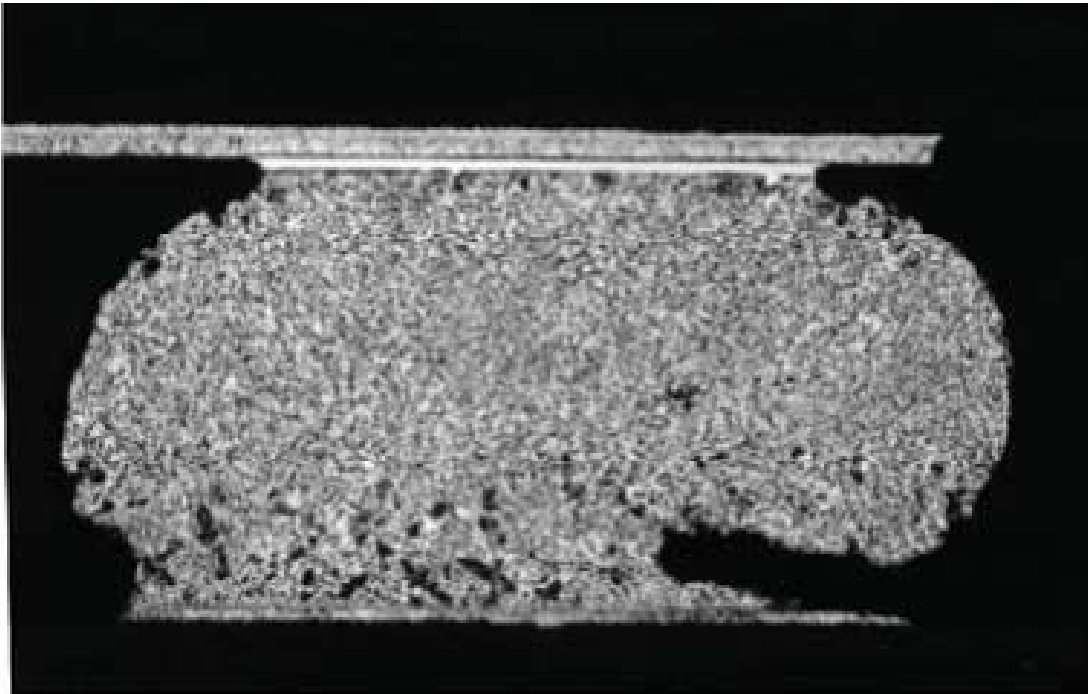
Microsection through ball showing partial wetting of solder to pad: Reject
